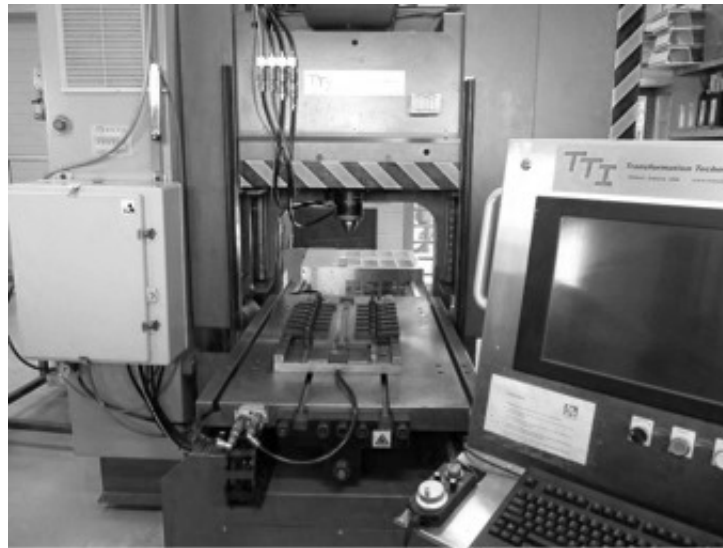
FSW Machine SAPNC, RM1 of Manufacturing Technology.
